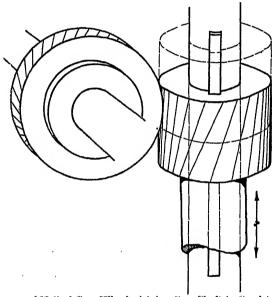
Diagram of Helical Gear Wheels driving Cam Shaft in Carels' Reversing Gear,
